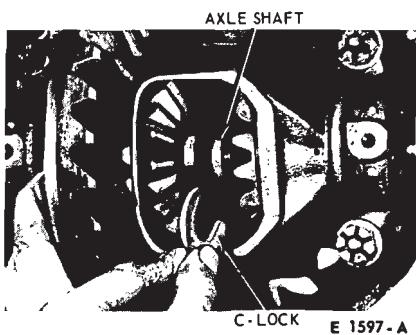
Removal and Installation of C-locks and Axle Shaft
